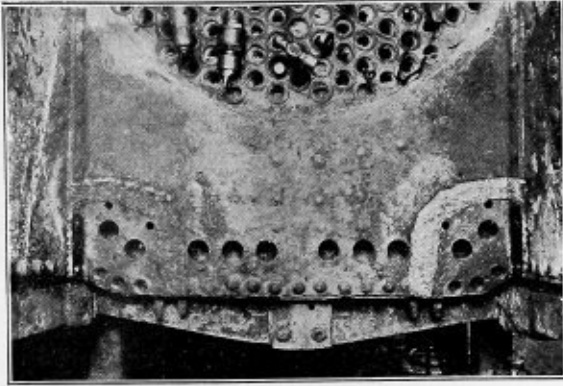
Shows Pieces of the Flue Sheet Welded in Position Ready to Rivet
